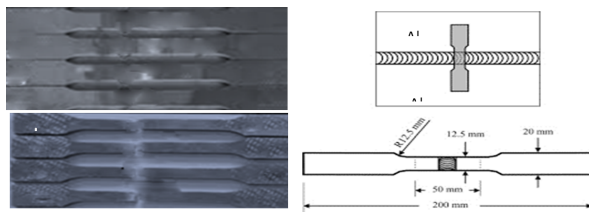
(A) Photos of the specimens after tensile test. (B) Photos of the specimens before tensile test. (C) Dimensions of tensile test specimens (dimensions are in millimeter)
